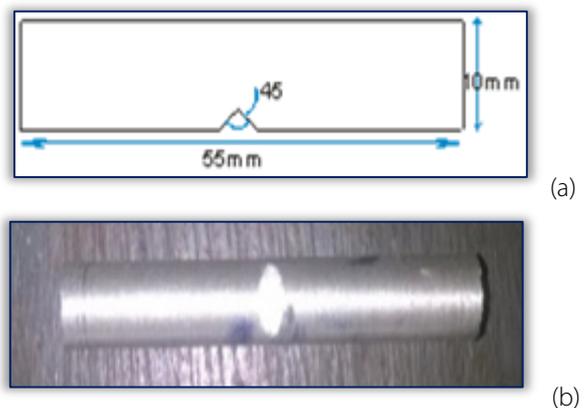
Sample for Izod Impact Test (a) Schematic and (b) Sample piece
